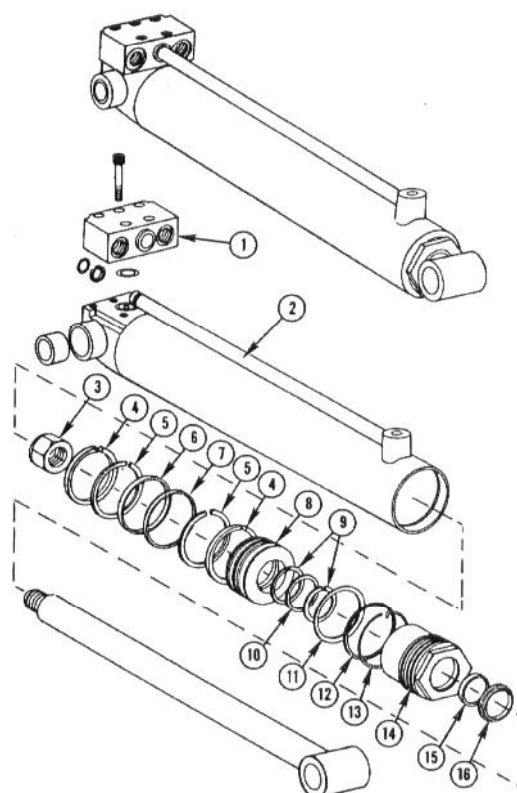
Identification of Parts Typical of MF Part No. 1605 174 M91
